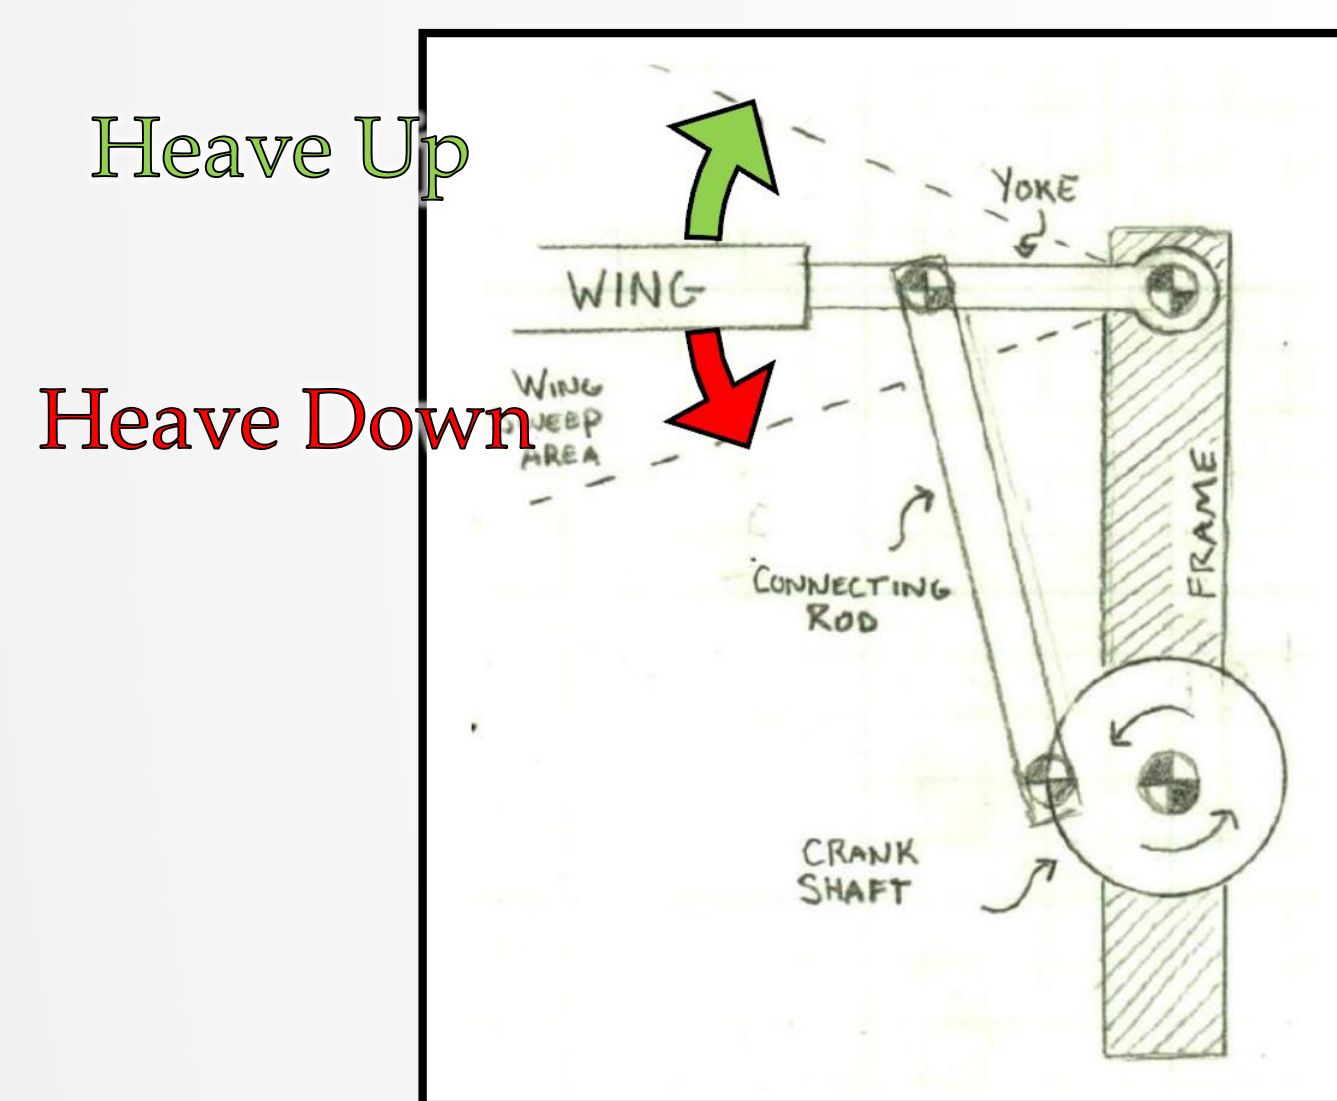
Wing mill flapping motion (Termed "heave" here)
